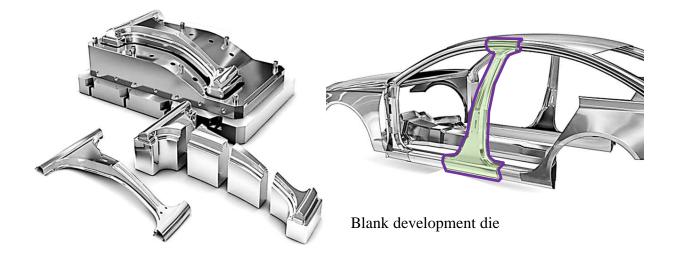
Blank development die for hot stamping of centre pillar [74].
